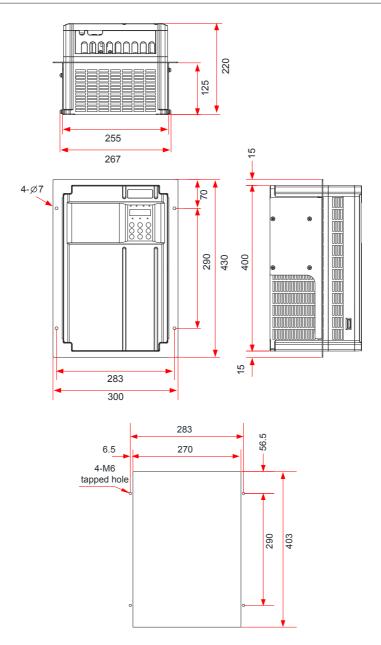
Mounting bracket dimensions and hole spacing for 30–37 kW AC drive models
